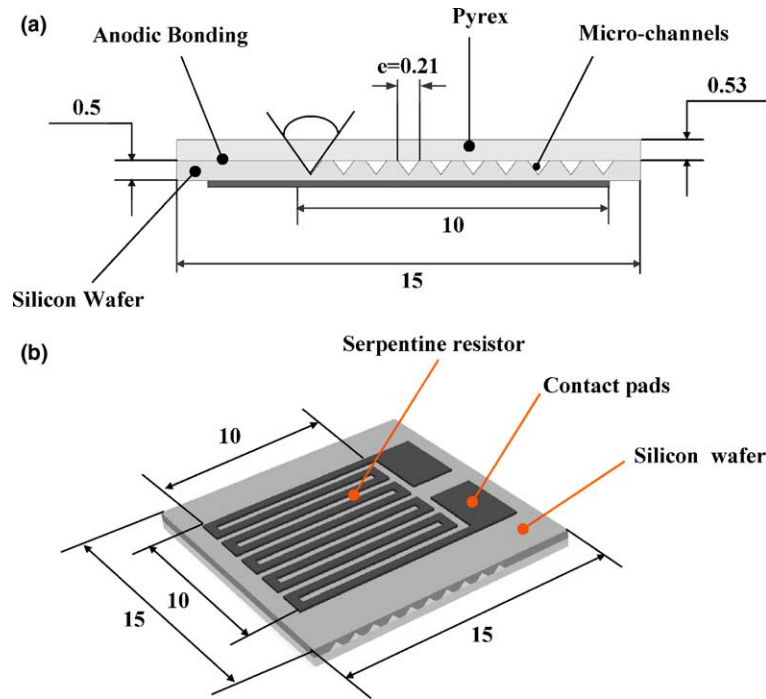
Test chip with heater. (a) Cross-section; (b) heater (all dimensions are in mm).
